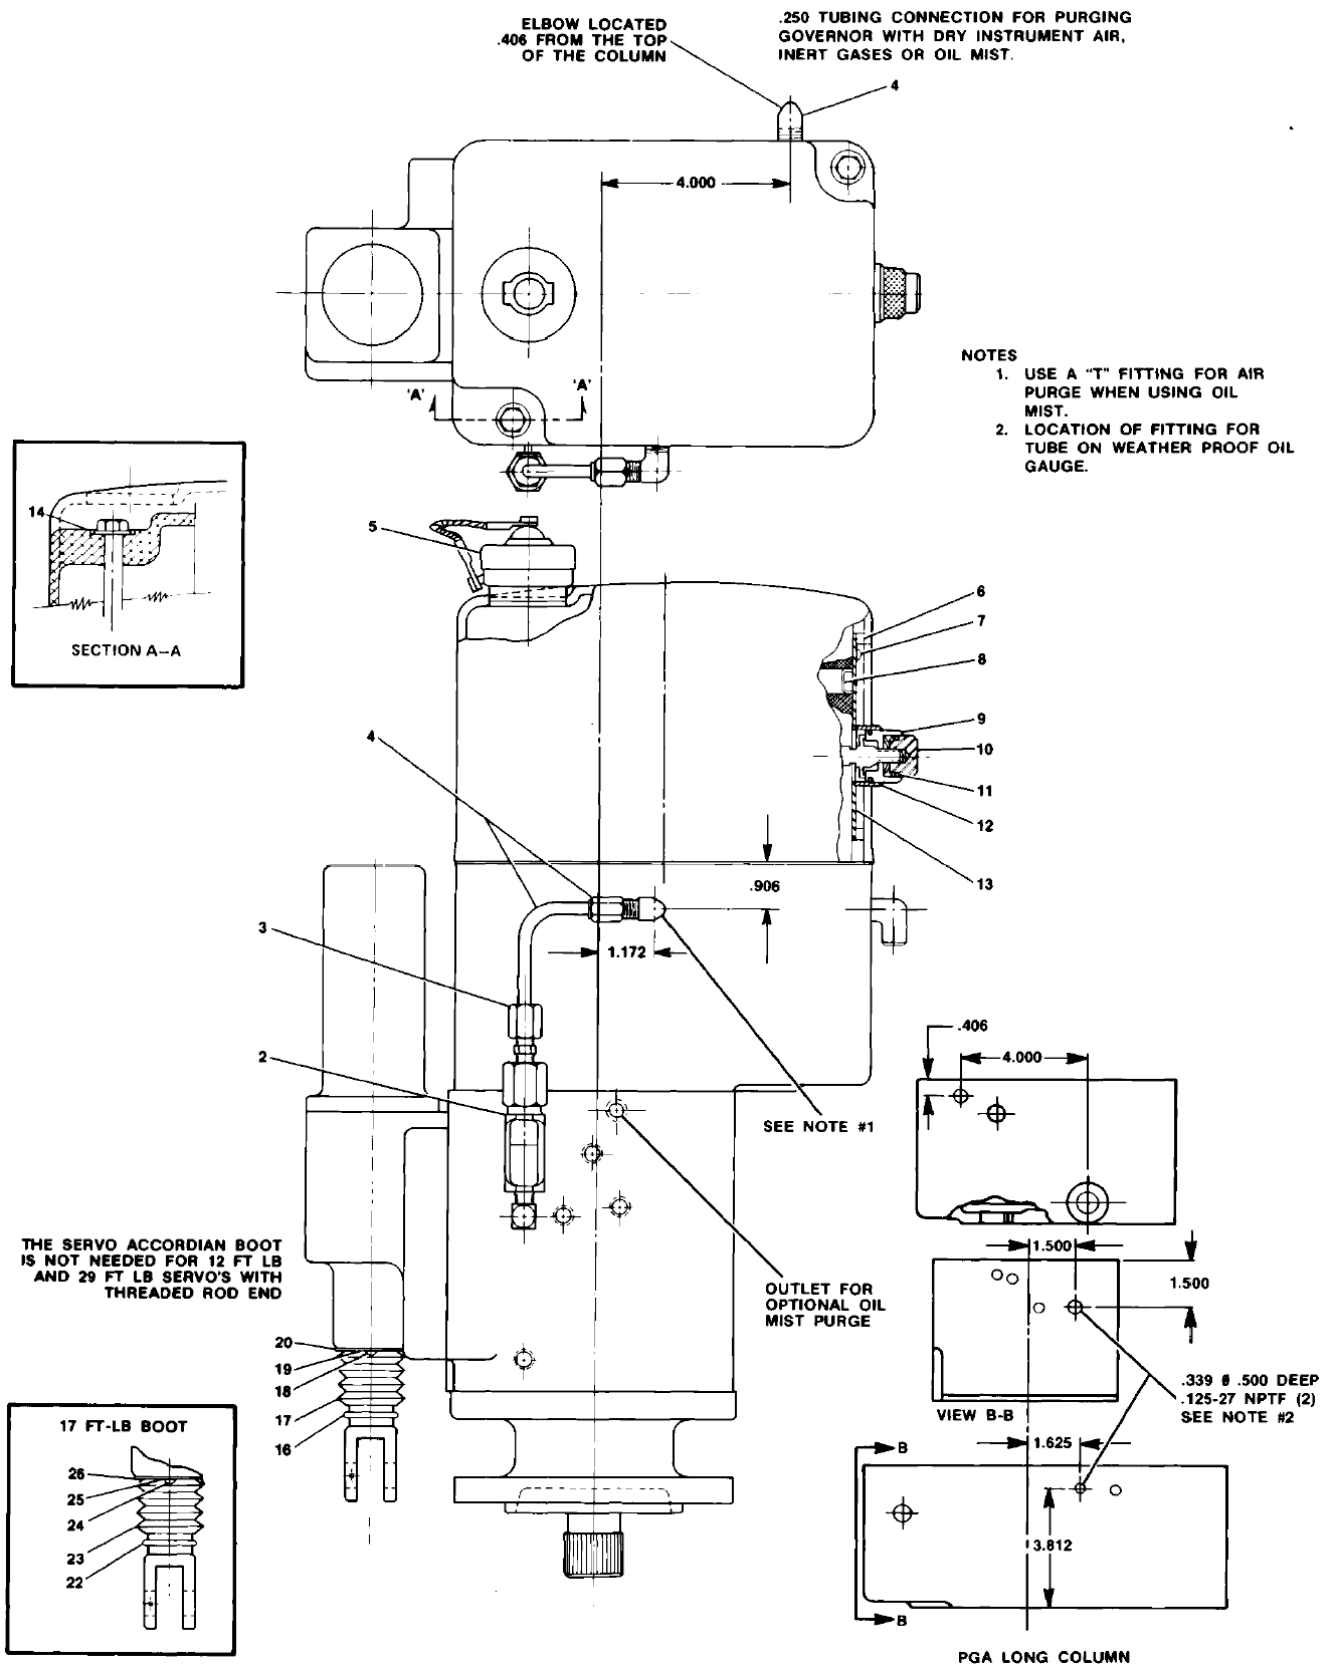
Outline Drawing for PG-PL Governor Showing Location of Weatherproof Fittings
